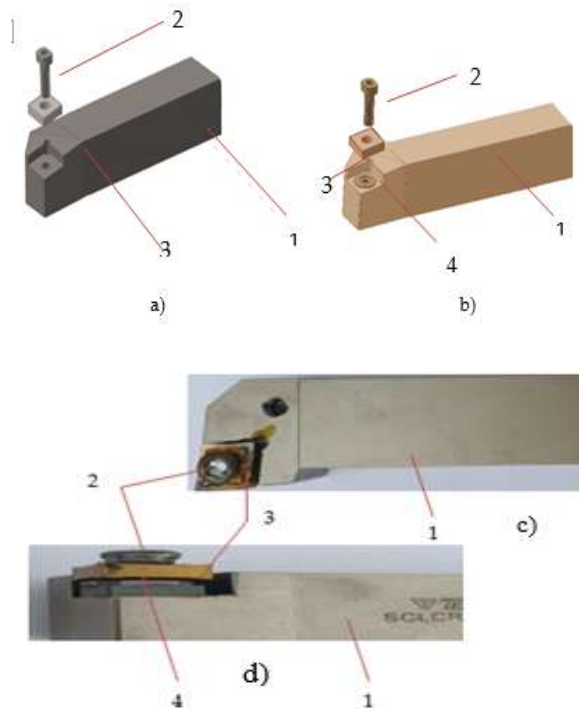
Turning cutting tools used in the research: a, c - in the classic version (T01); b, d - with improved constructive form with an elastic washer (T02); 1-knife body; 2-fixing screw; 3-removable insert; 4 - elastic washer; d - improved cutting tool used during research
